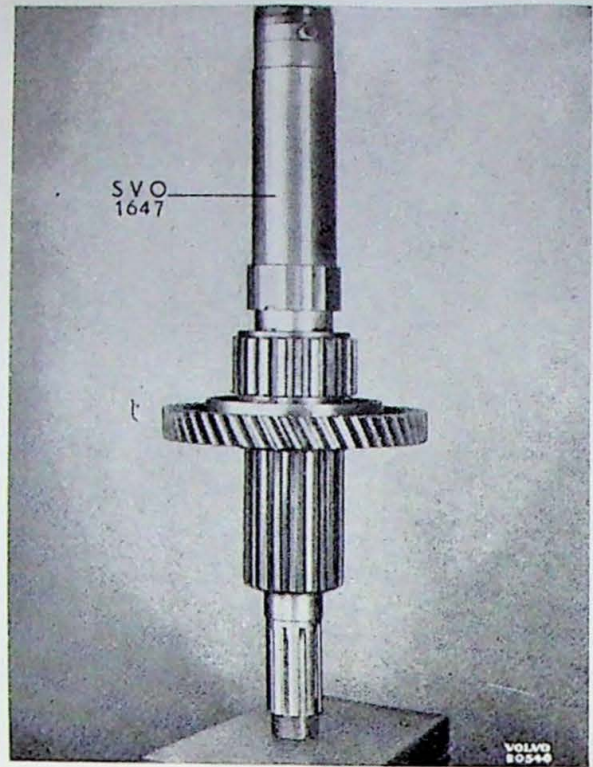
30. Fitting the bushing for 3rd speed gear on the mainshaft.
